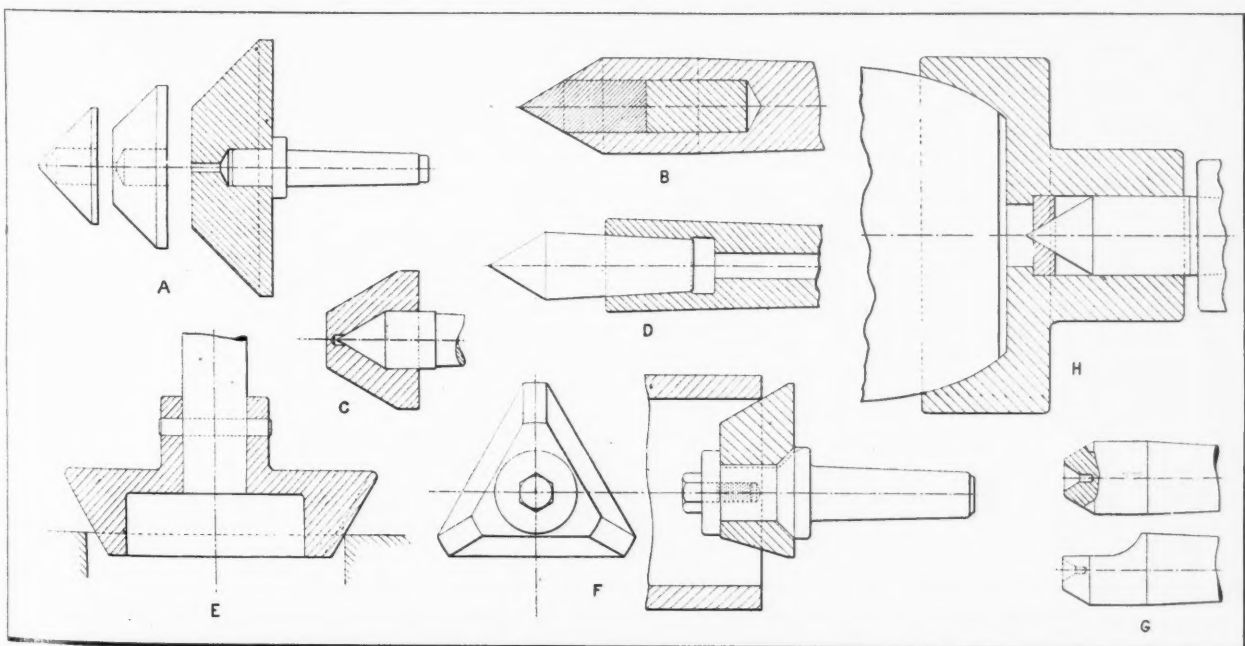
(A) Arbor and Interchangeable Pipe Centers; (B) Center with High-speed Steel Point; (C) Center with Extra Capacity Ring; (D) Removable Center; (E) Large Center used on Boring and Turning Mill; (F) Three-point Bearing Center; (G) Hollow Center of Usual Design; (H) Method of supporting End of Shell
